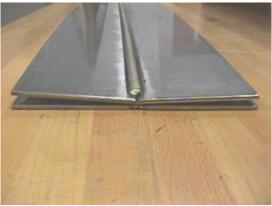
Complete penetration square groove butt-joint welds produced on 1.5-mm thick Type 304 plate with and without EWI DeepTIG flux
